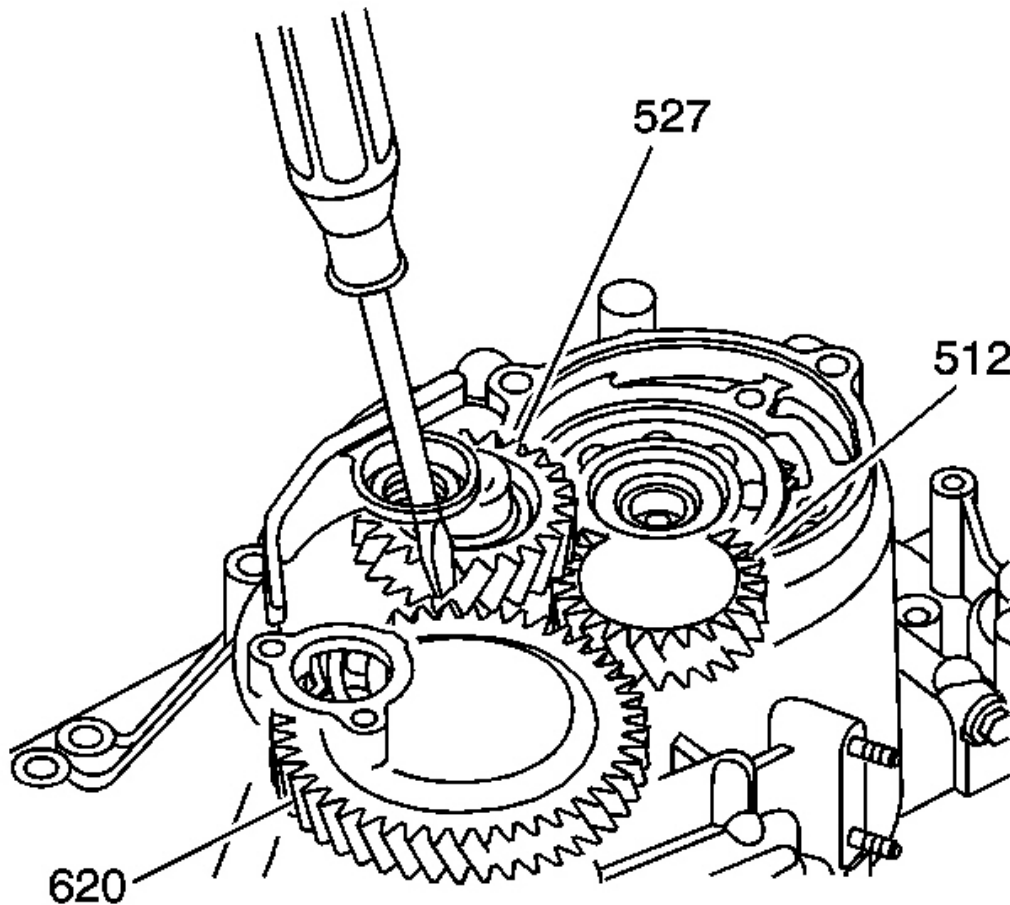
Rotating The Reverse Idler Gear To Engage The Reverse Gear With Reverse Driven Gear & 5th/Reverse Drive Gear Using A Screwdriver
